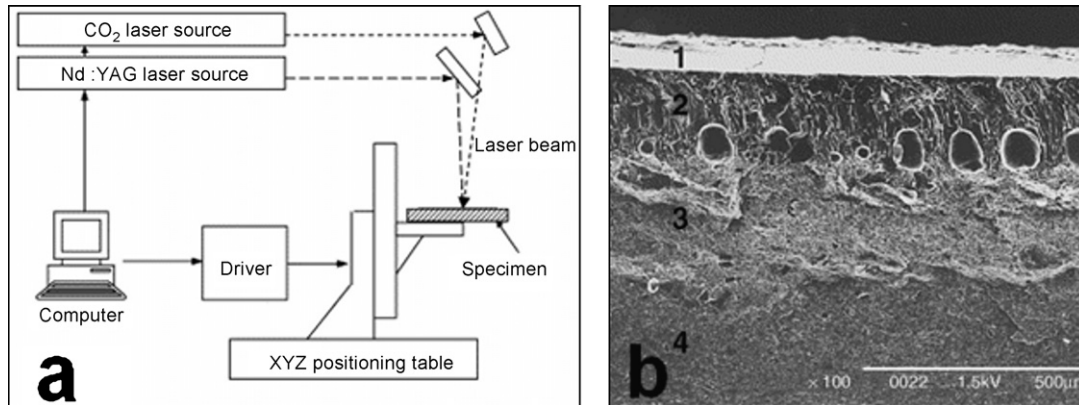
(a) Configuration of laser cutting using controlled fracture technique. (b) Fracture surface of alumina substrate. (After Tsai and Chen⁷⁶ with permission. Copyright Elsevier.)
